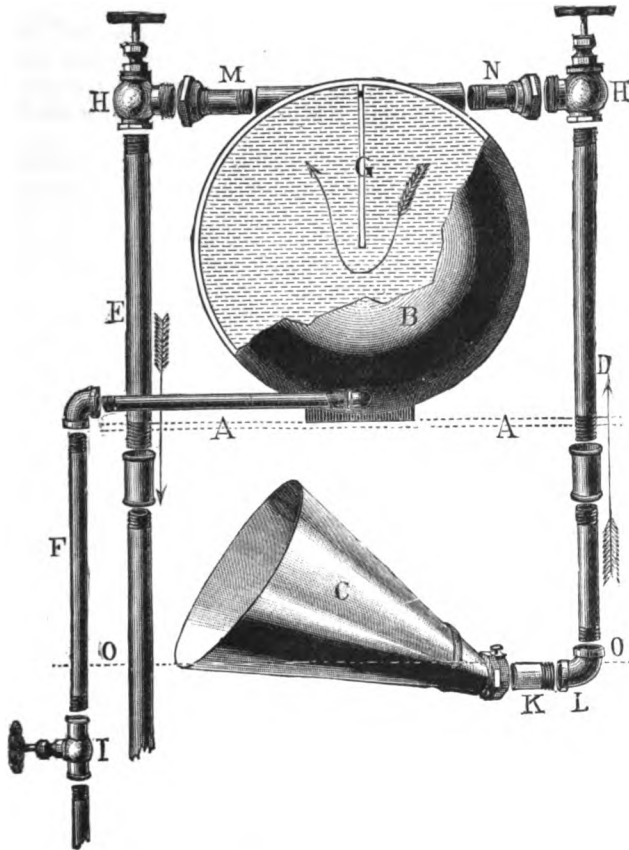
THE HOTCHKISS BOILER CLEANER.
